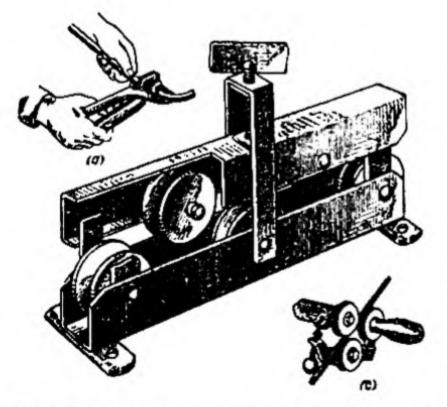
Tools used to straighten and bend grade ΤΠΡΦ (TPRF) lockjointed, steel-sheath wire:
